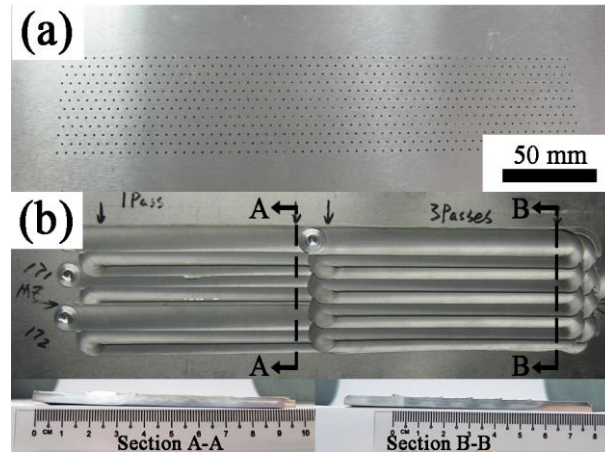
AA6061-T6 plates (a) showing array of holes and (b) after FSP.
